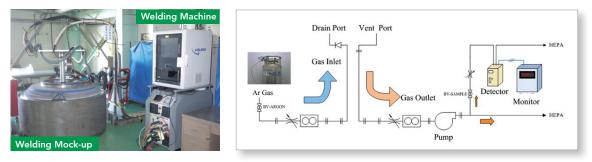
Remote-Control Welding Machine (left), Hydrogen Detection System (right).
